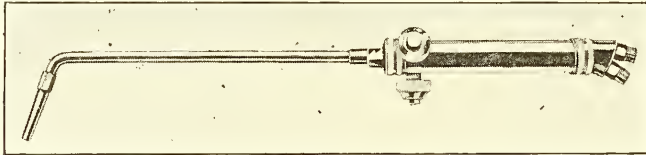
The Imperial Type B Welding Torch.
